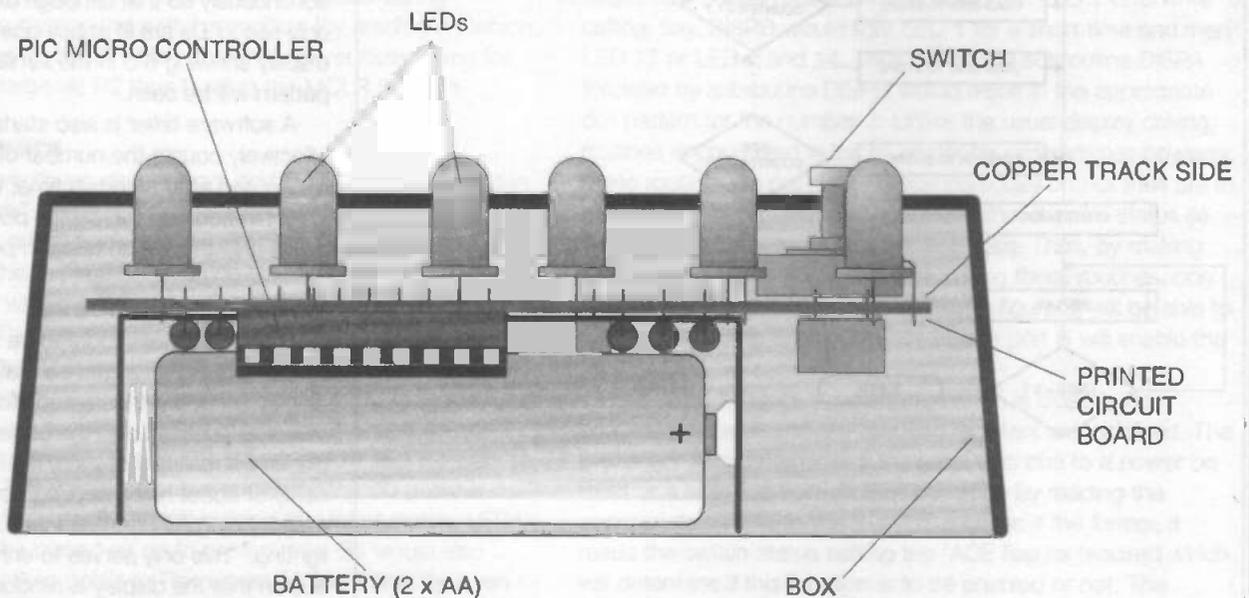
the suggested assembly, showing LEDs and switch mounted on the track side of the PCB
